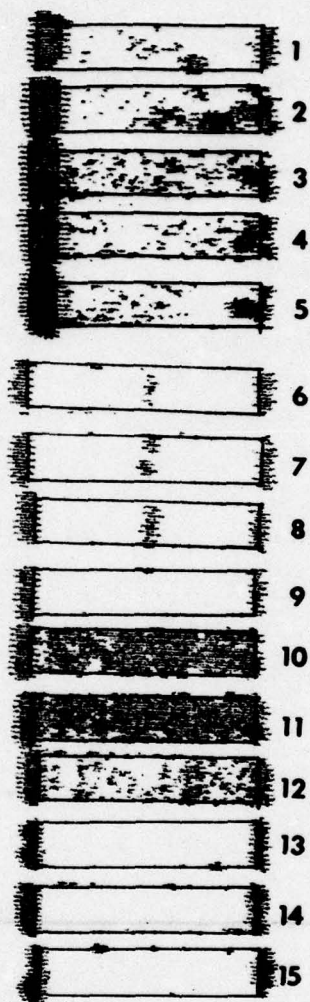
C-scan Recording of 45 MHz, 18° Surface Wave Inspection of Tensile Surfaces of NC-350 RBSN Four-Point-Bend Specimens.
